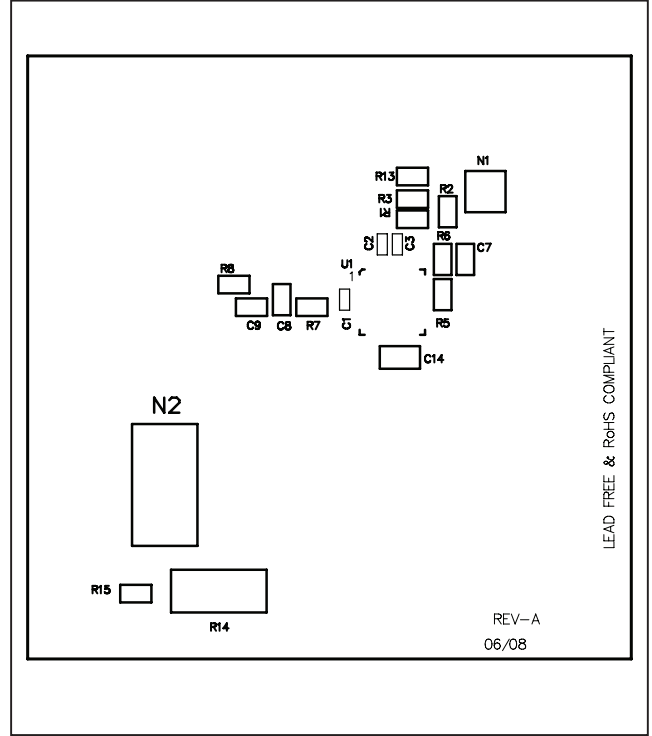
MAX15035 EV Kit Component Placement Guide—Solder Side
